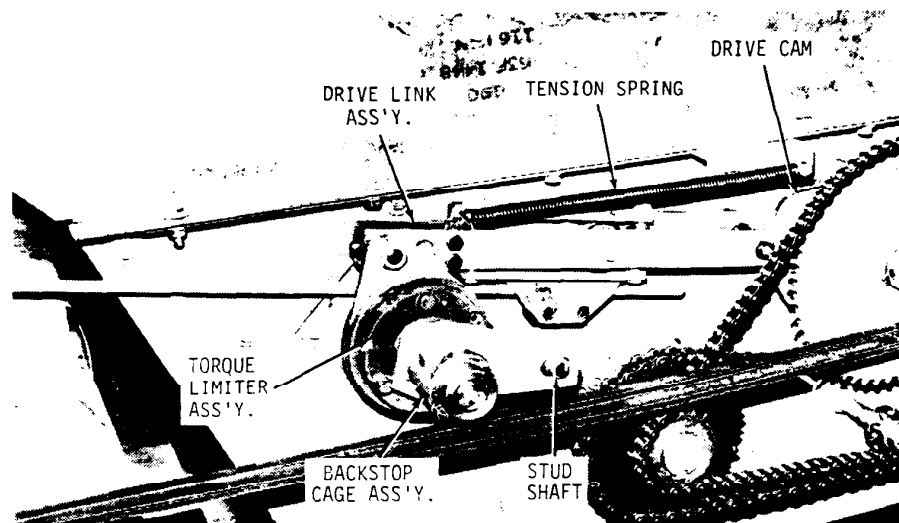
VIEW OF METER ROLL DRIVE PARTS
